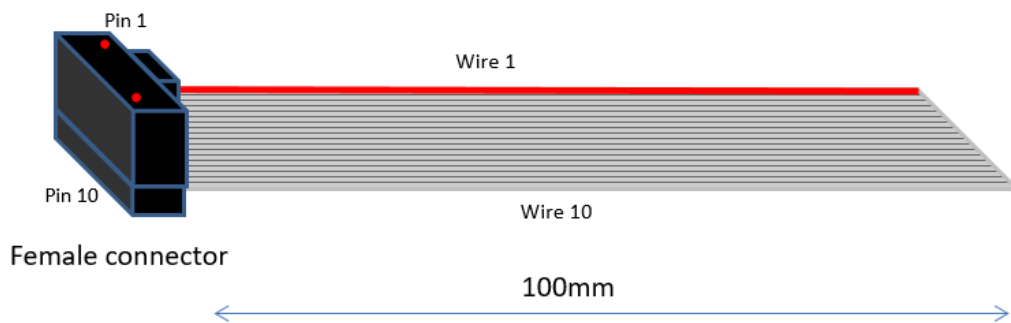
Flat cable drawing C – Breakout Board shipped without a Base Board
